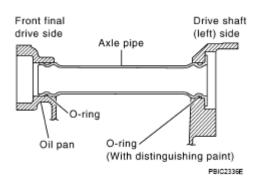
Identifying Paint Mark On Front Drive Shaft (Left) Courtesy of NISSAN MOTOR CO., U.S.A.
